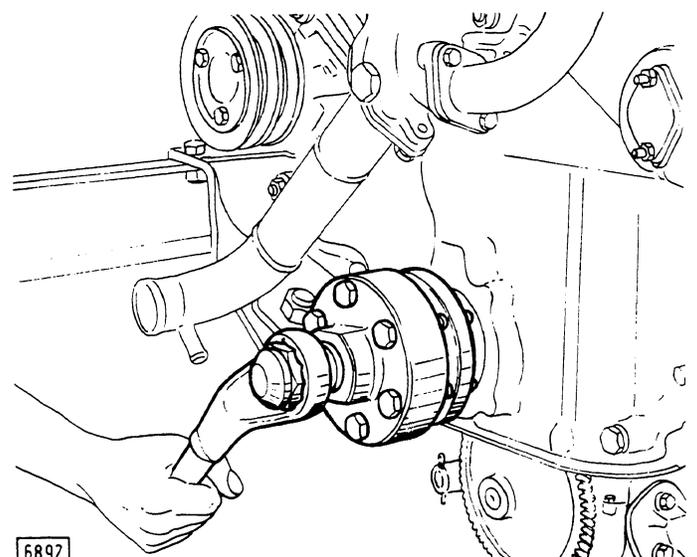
Removing Crankshaft Vibration Damper Using Extractor 291504
